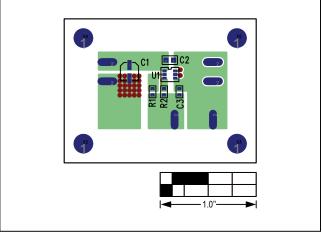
MAX5048C EV Kit PCB Layout—Component Side
